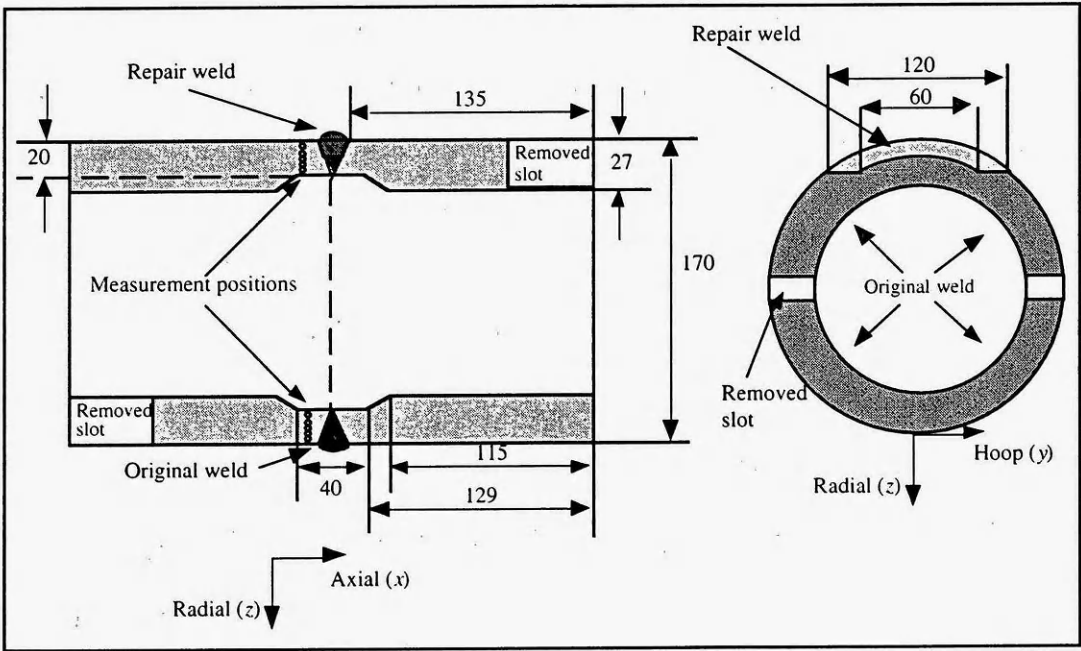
Schematic diagram of the welded component (smaller diameter pipe) and axis definition. All dimensions are in millimetres.
